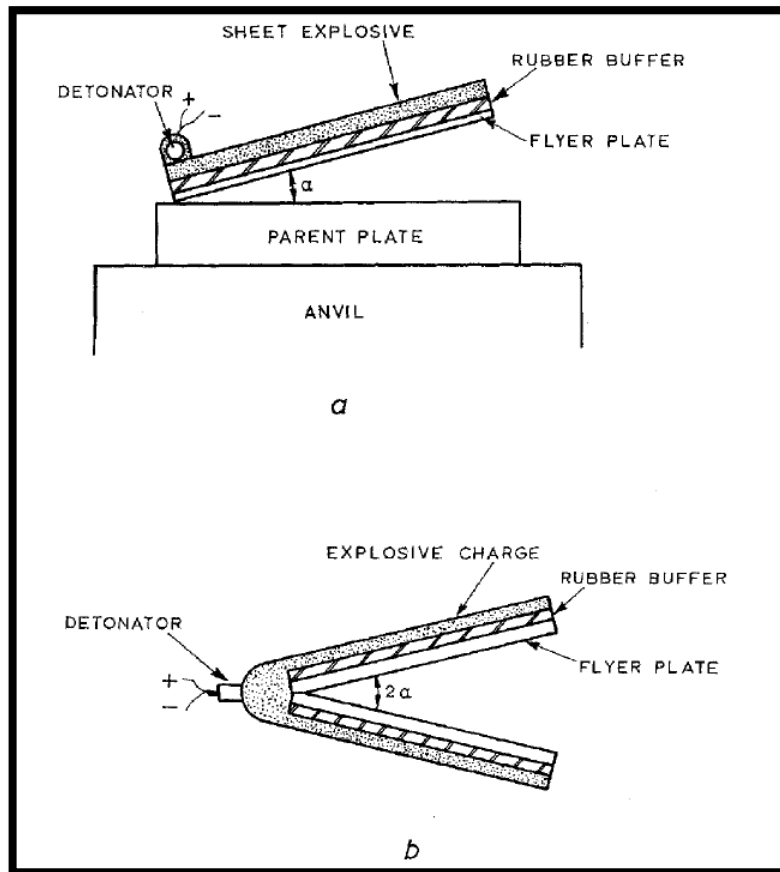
Primary flat plate geometric welding configurations. (a) Asymmetric welding. (b) Symmetric welding. (Symmetry only intended with respect to geometry; not material properties) [45]
